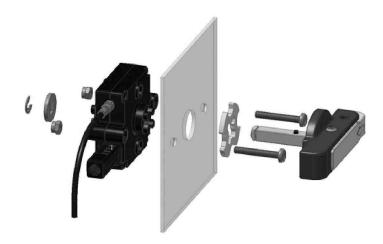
CBkit_Interlock_4 mounting on the Switchgear door
